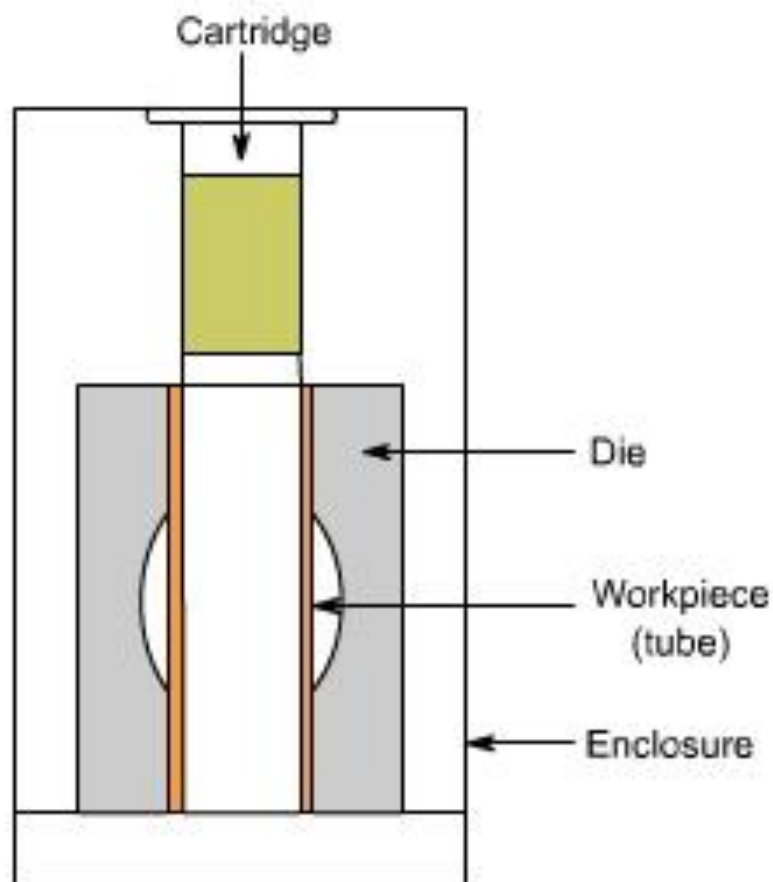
Schematic illustration of contact technique of explosive forming.
